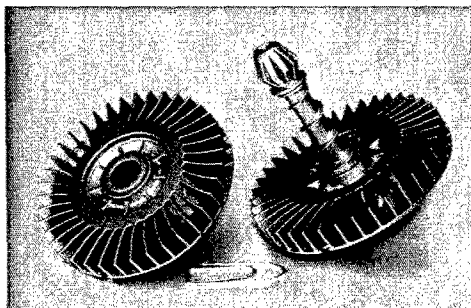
Parts made directly by DMLS. Fan wheel geometry by TransCAT GmbH.
